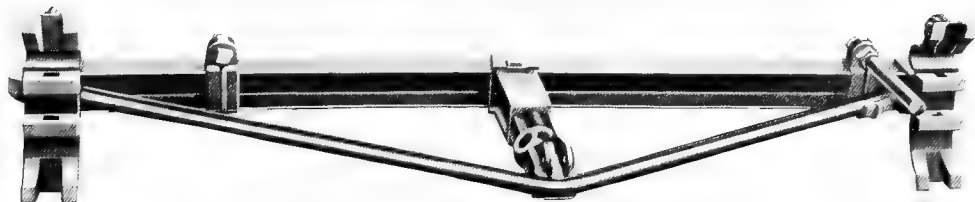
Drexel Brake Beam with Keyed Strut.
